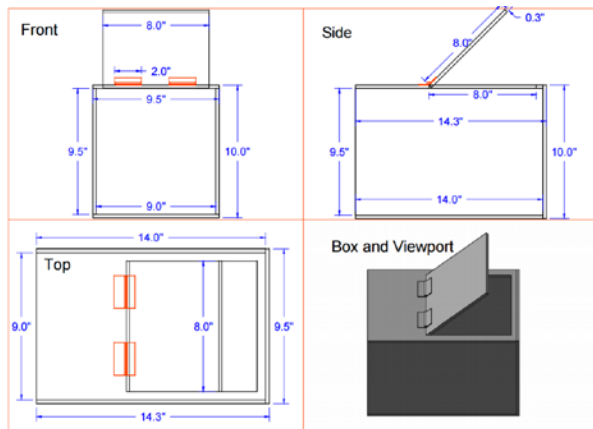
Contains the views of the dimensions used for the final layout of base box and viewport (AutoCAD work by Max Wrigley).
